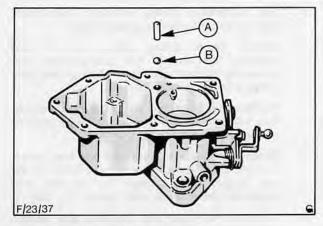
A - Accelerator ball valve weight B - Accelerator ball valve
